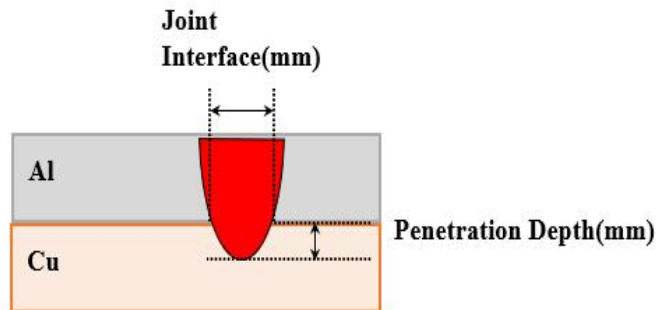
Joint interface and penetration depth of welded joints
